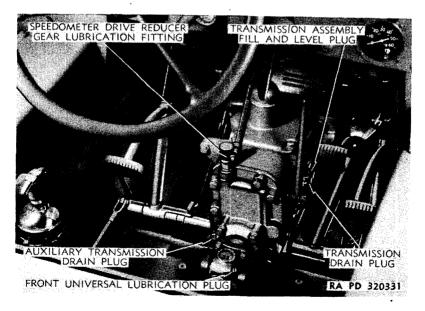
Lubrication Fitting on Transmissions and Front Universal
